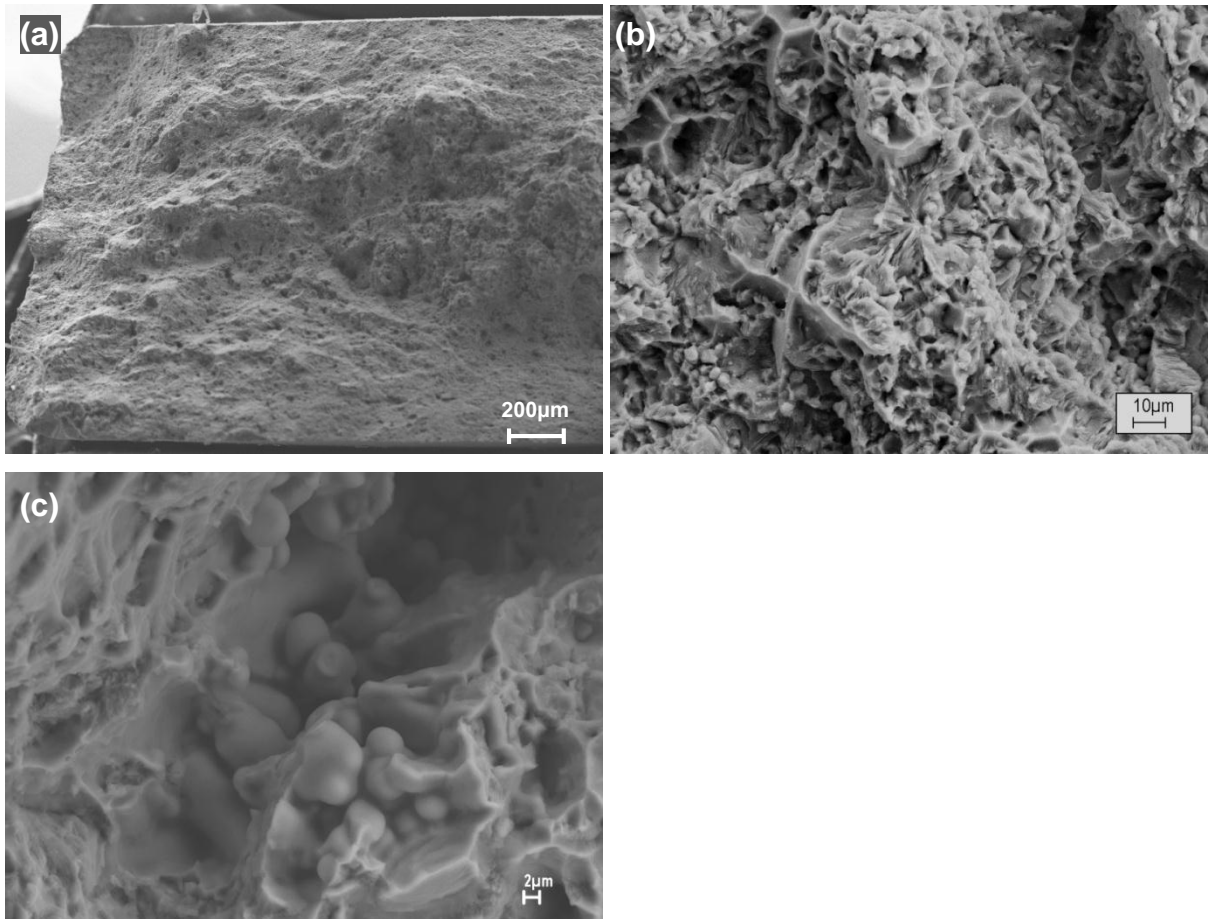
Typical fractographs on a cross section of 2×6.35 mm flat die-cast tensile sample (a) overall fractural image, (b) fracture surface at high magnification, and (c) detailed fracture.
